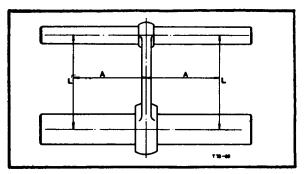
CHECKING CONNECTING ROD ALIGNMENT
